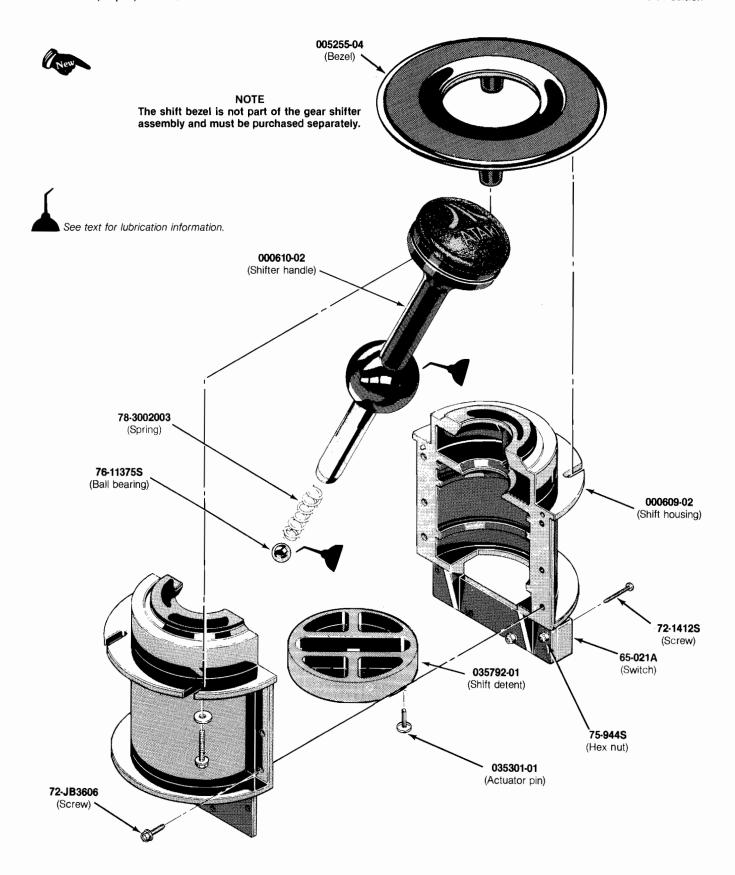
Gear-Shifter Control Assembly A000608-09 Y
